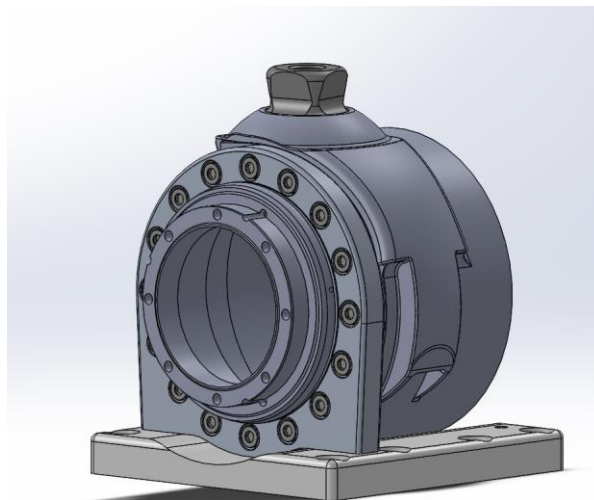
PHP attachment ring secured to the attachment plate and screwed into the motor housing
